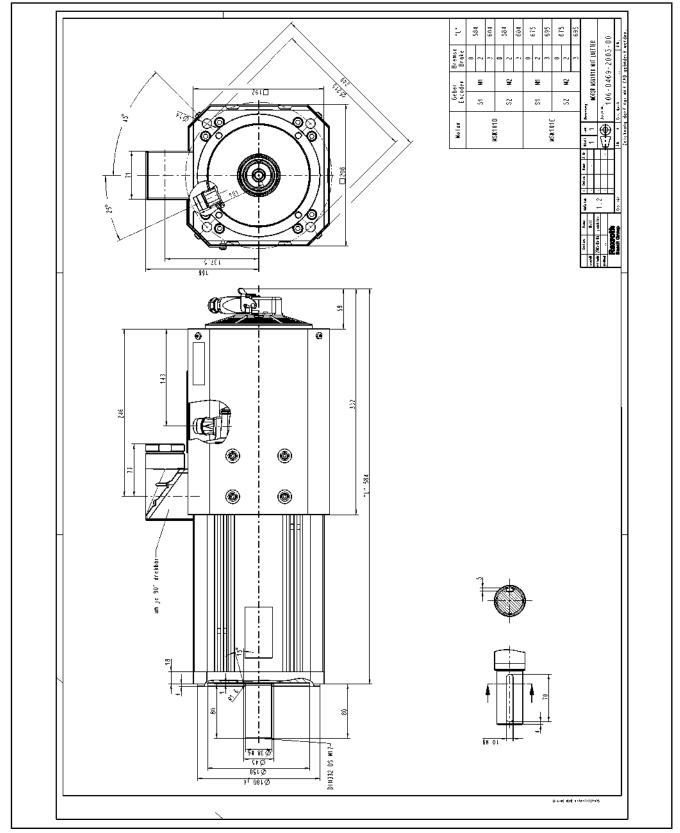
Dimension sheet MSK101 with axial fan unit
